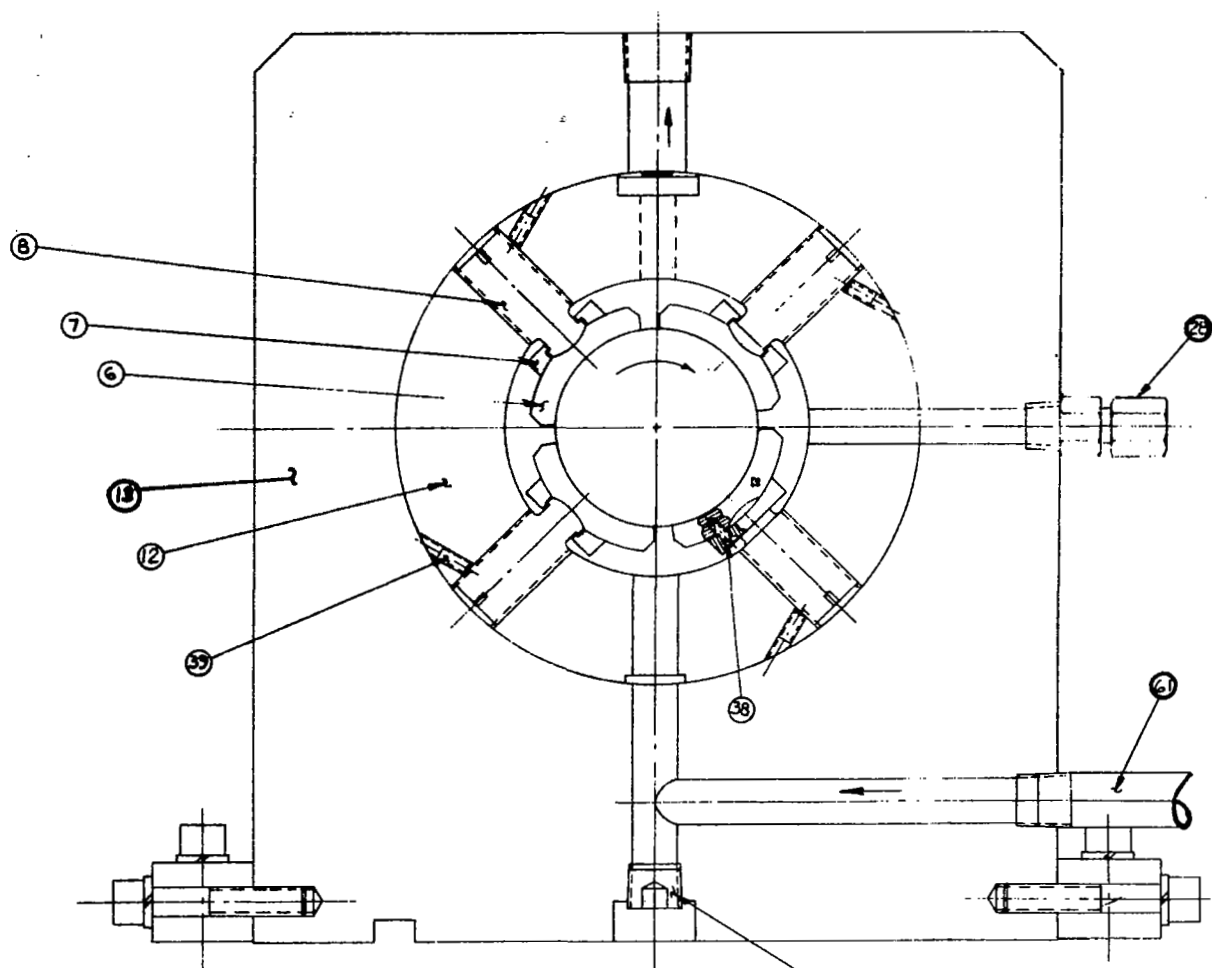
Thrust Bearing Assembly Drawing of Flexible Rotor
